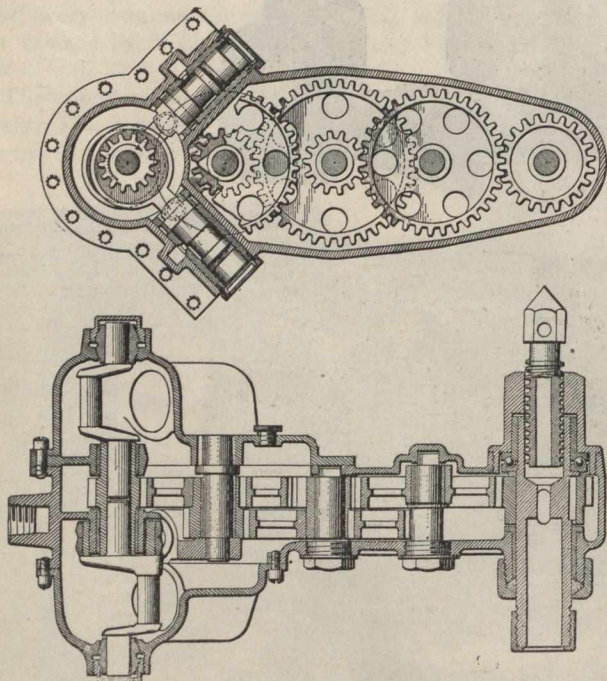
Sectional Views of the Little Giant Corner Drill.
